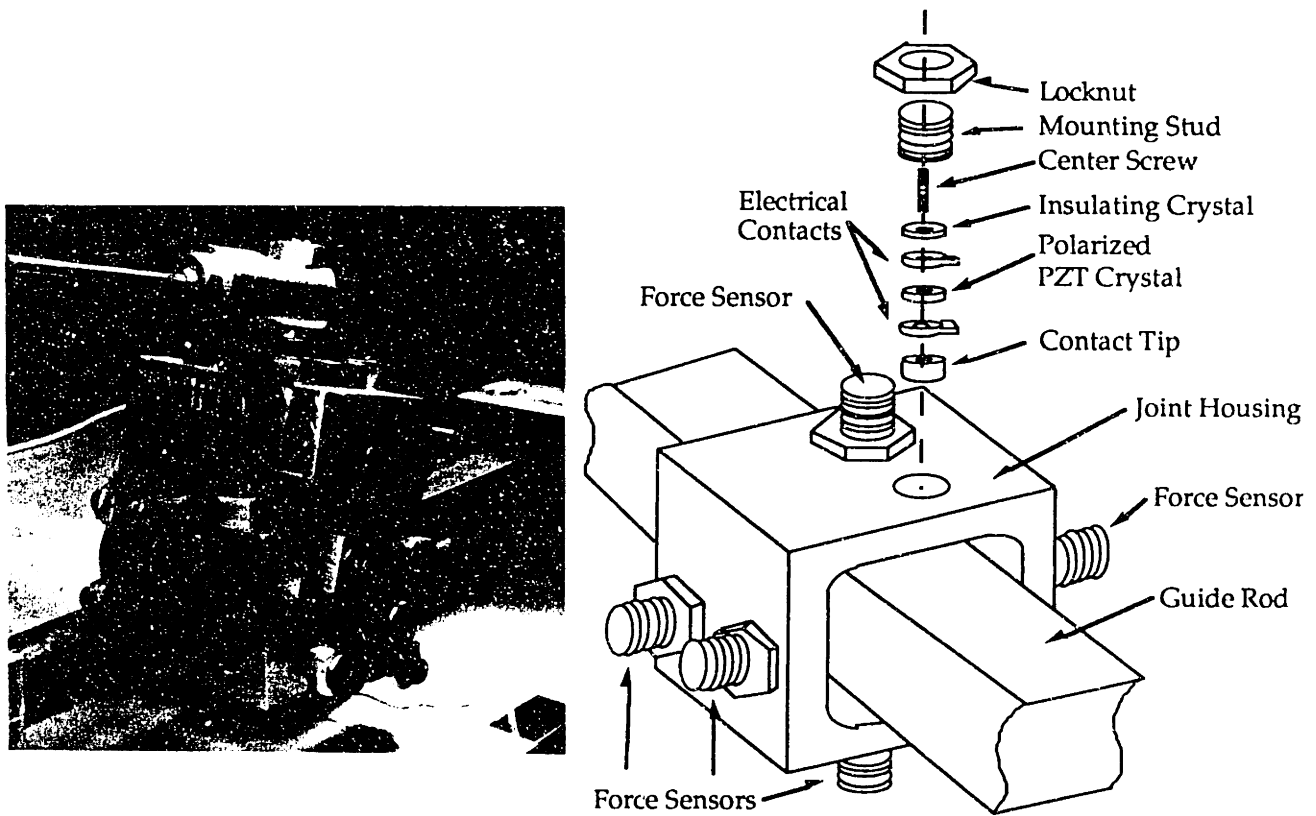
Instrumented, adjustable clearance prismatic joint.
